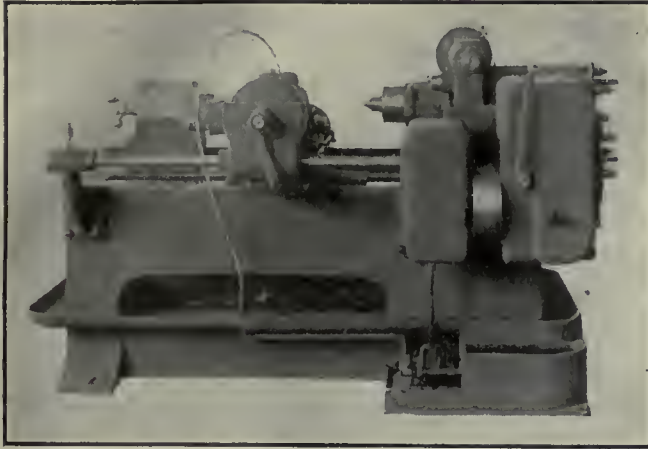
LEES-BRADNER THREAD MILLING MACHINE.
